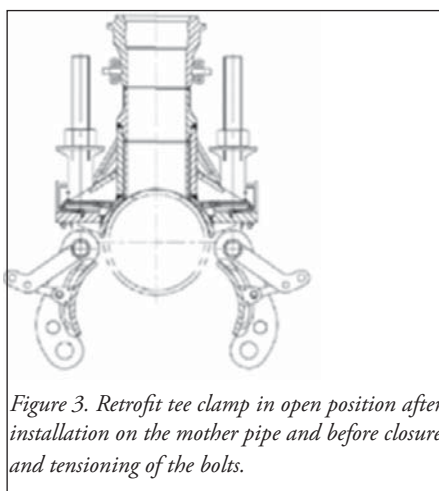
Retrofit tee clamp in open position after installation on the mother pipe and before closure and tensioning of the bolts.
